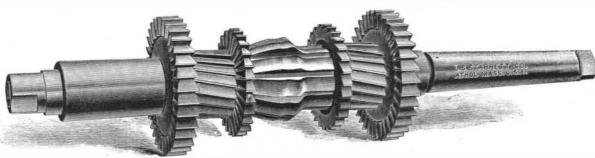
STARRETT'S GANGS OF MILLING CUTTERS.
